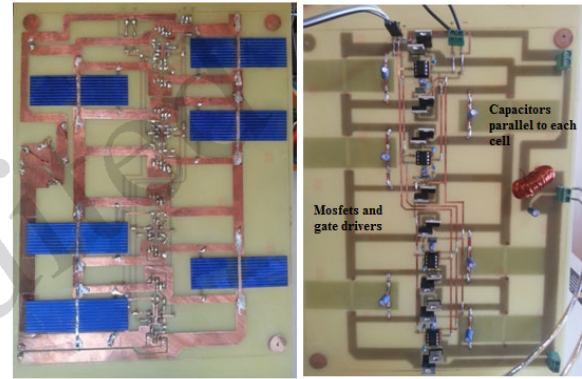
Experimental prototype; front surface (left), rear surface (right)
